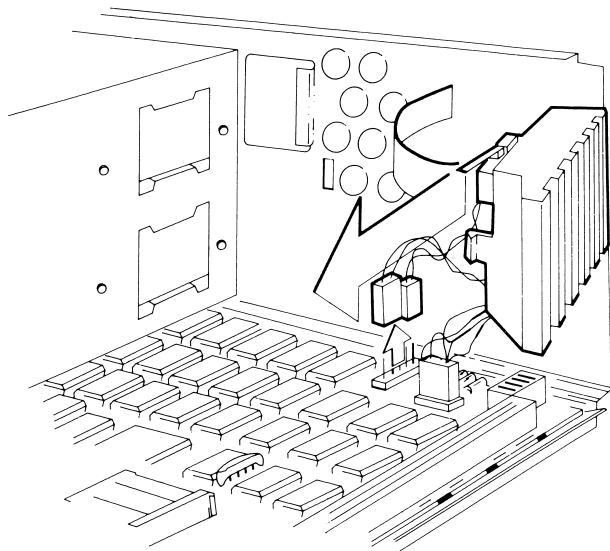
Removing the Speaker/Board Guide Assembly.
